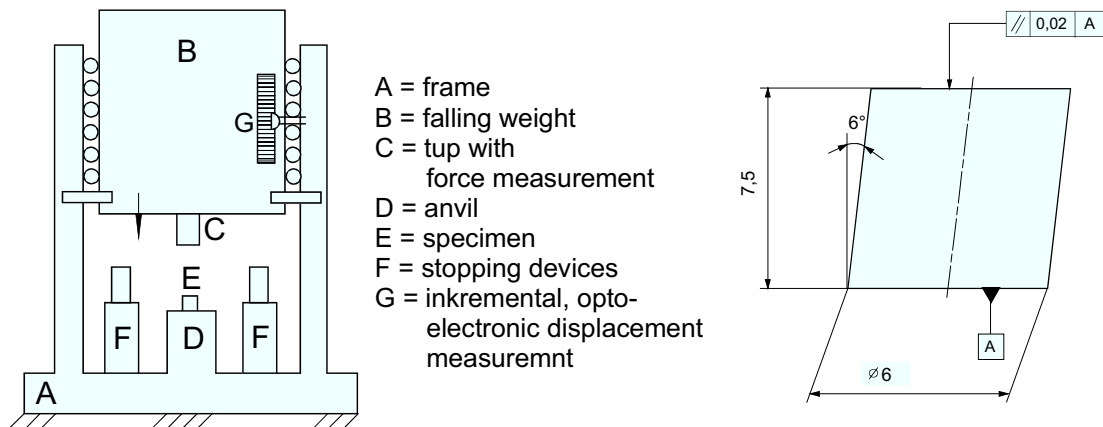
Principle of drop weight machine with biaxial compression/shear specimen with $h/d = 1.25$, front faces need to be parallel to 0.01 mm
